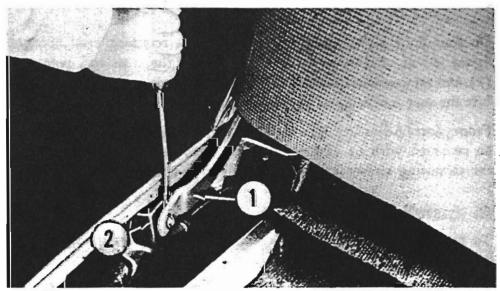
Pry the Outer Pivot Arm to Bring the Pivot Pin Out of the Pivot Bracket.
